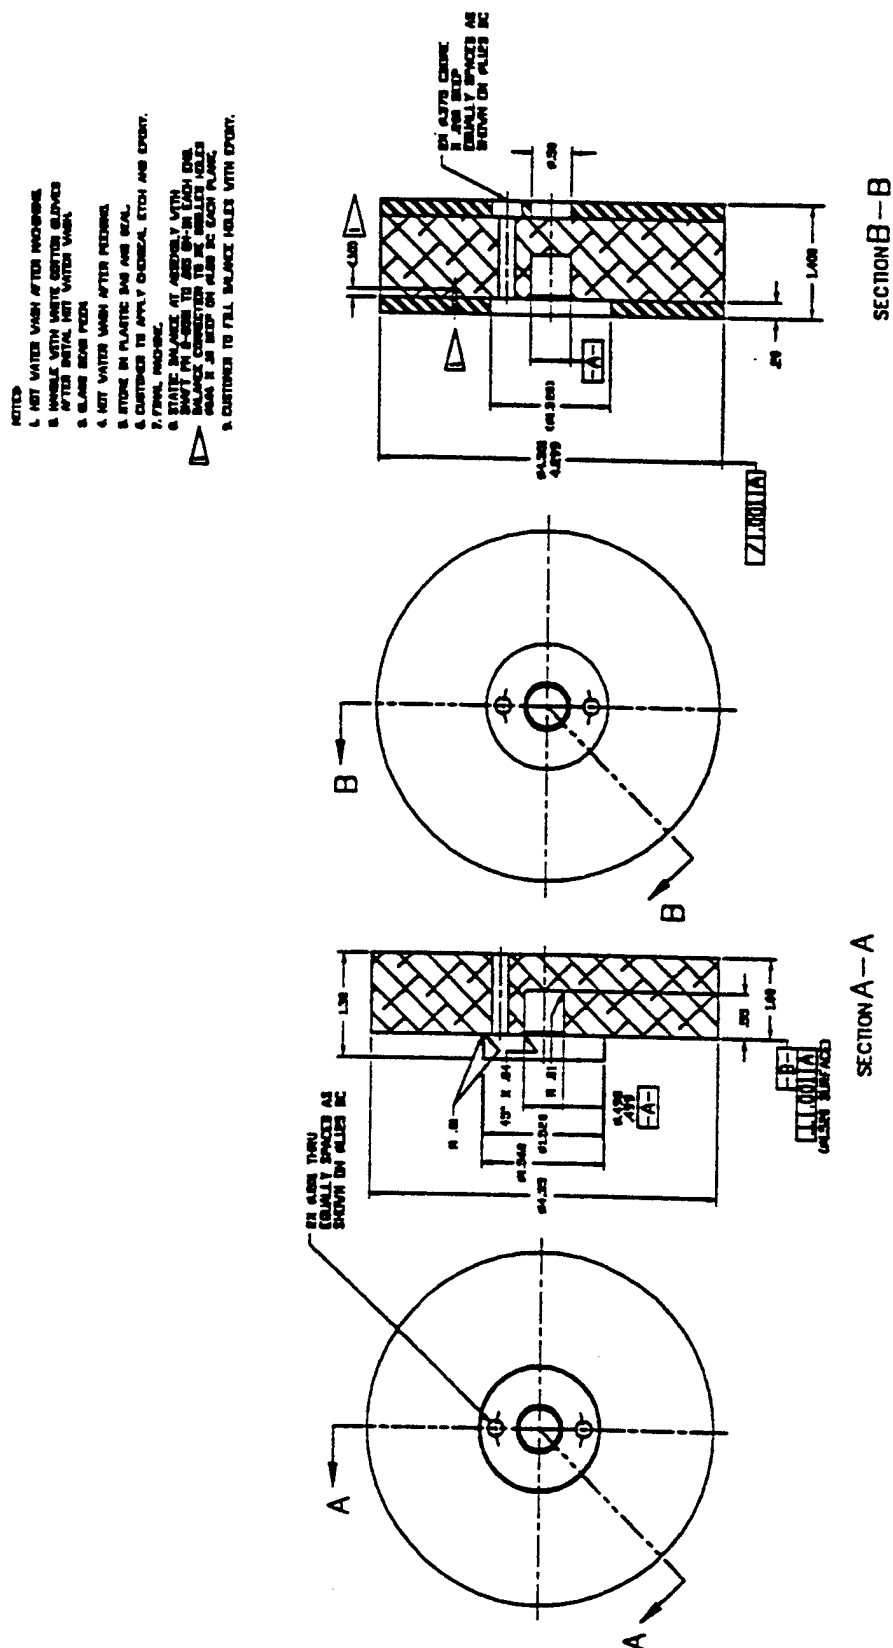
Rotor 6 Design Drawing (Adapted from Tech Development, Inc., Dayton, Ohio)
